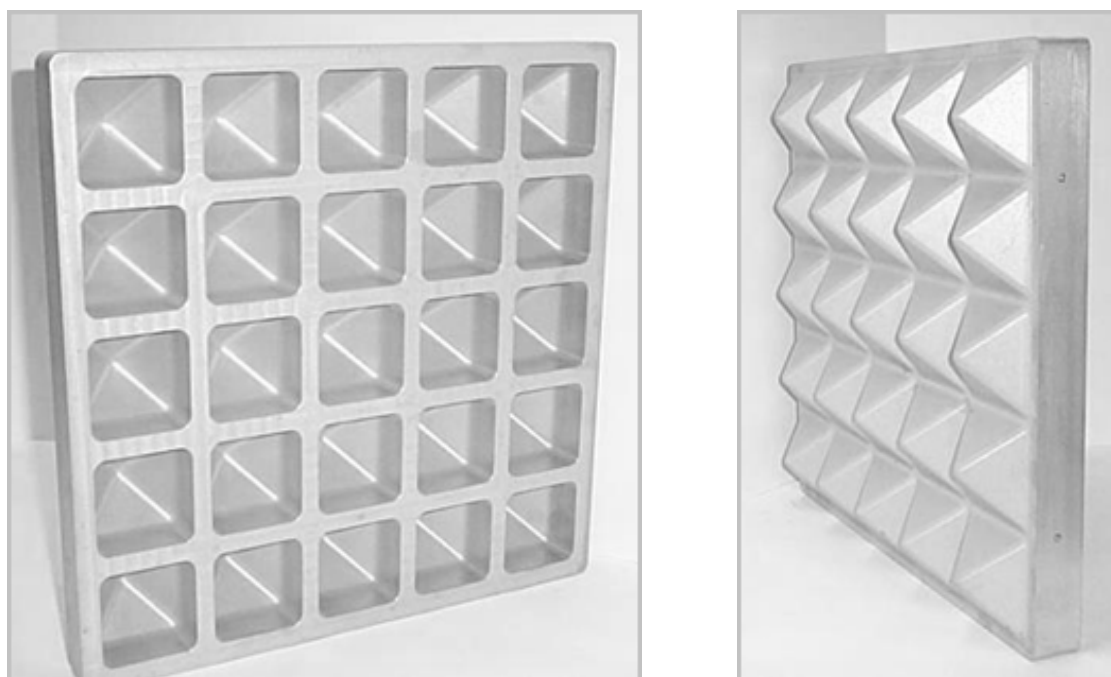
Porous metal vacuum mold, manufactured by CMS.
